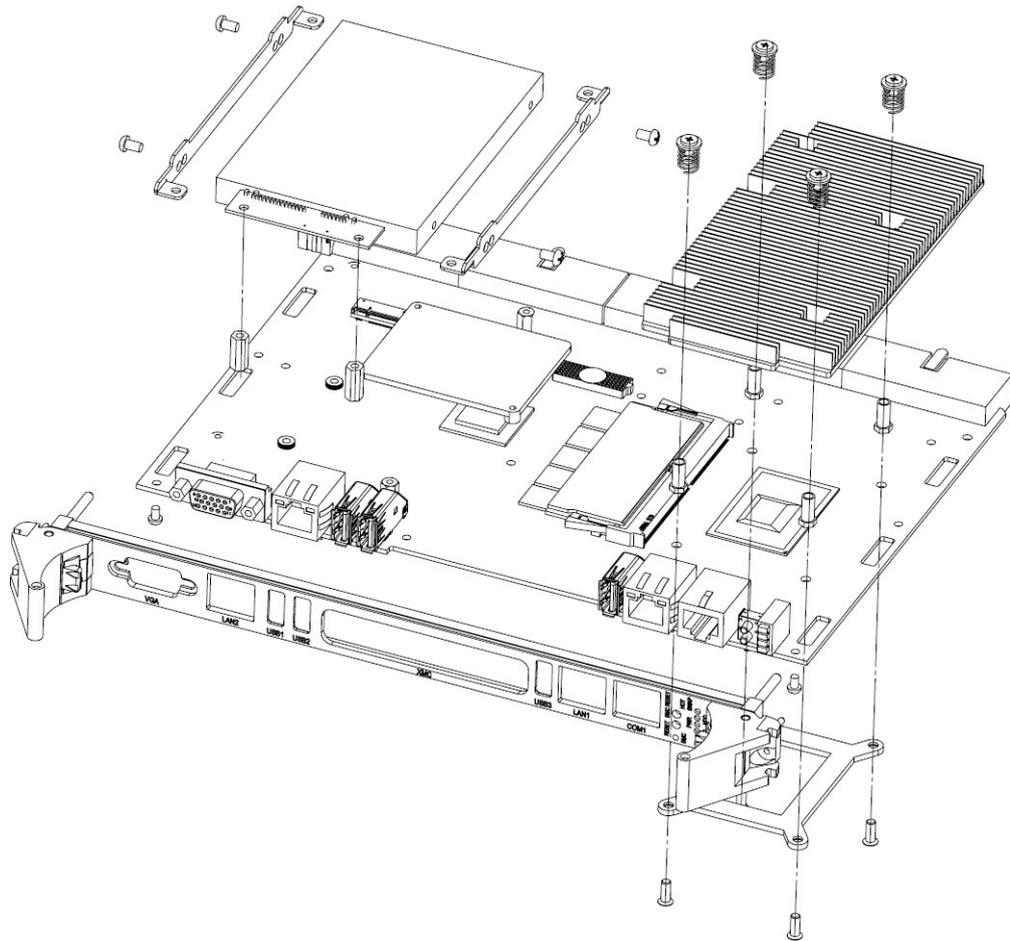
MIC-3399 Assembly with 2.5" HDD
